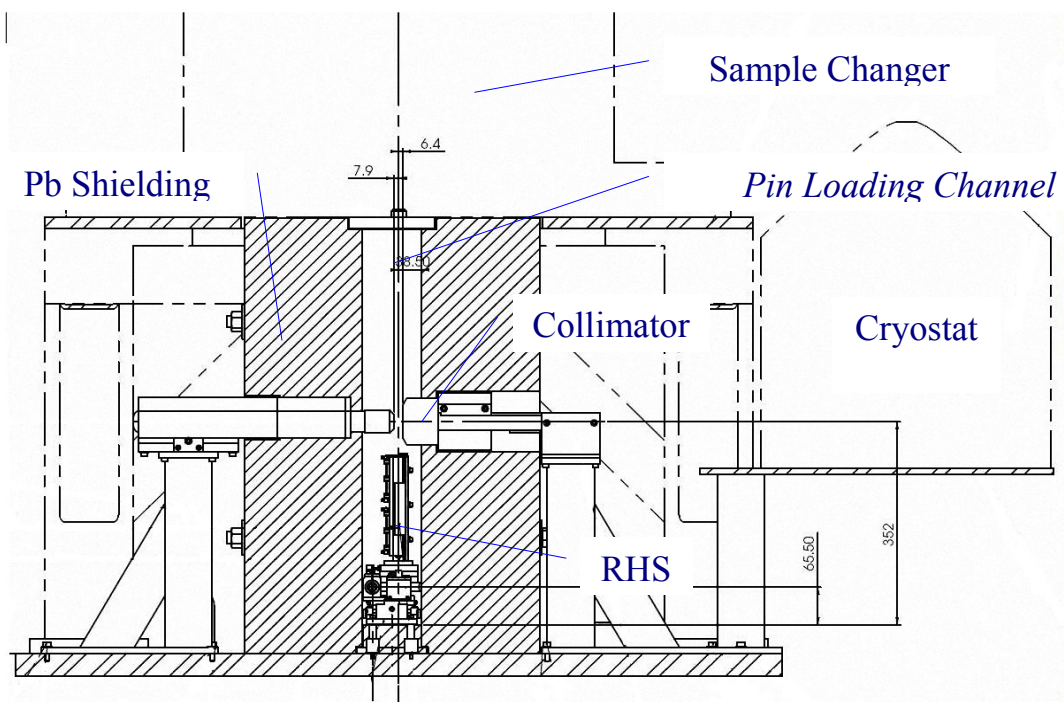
Engineering drawing (<yz> view); RHS: remote handling system.
